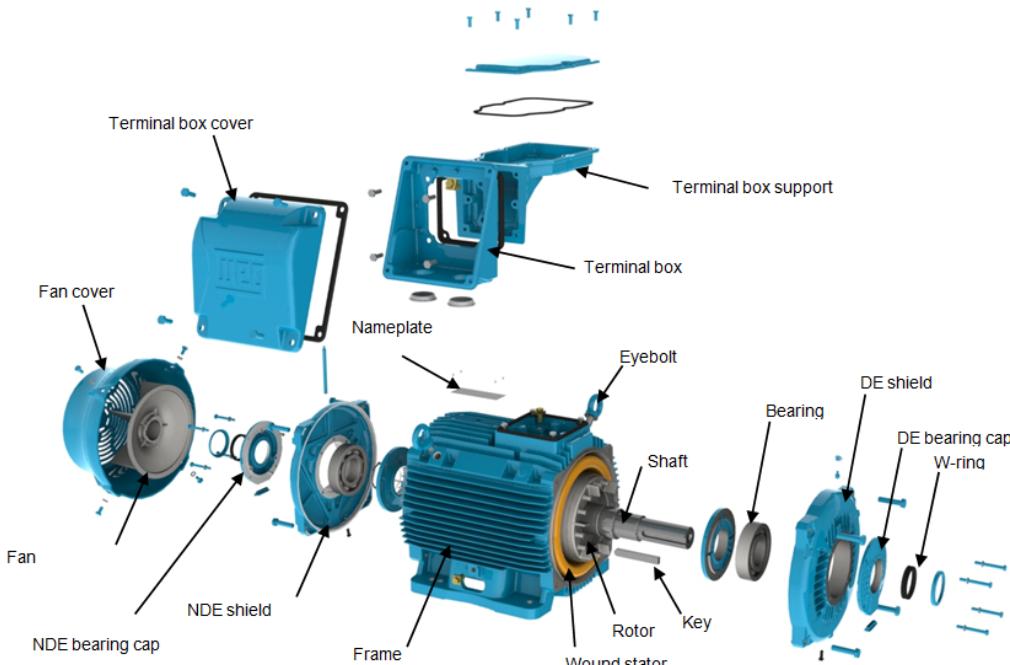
Exploded view of the components of a motor with the type of protection "ec".
